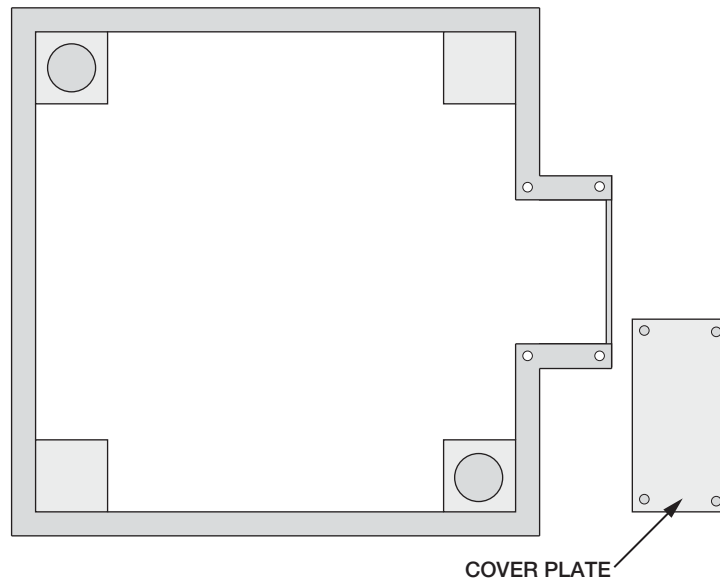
Heavy Capacity Pit Frame (Top View)
